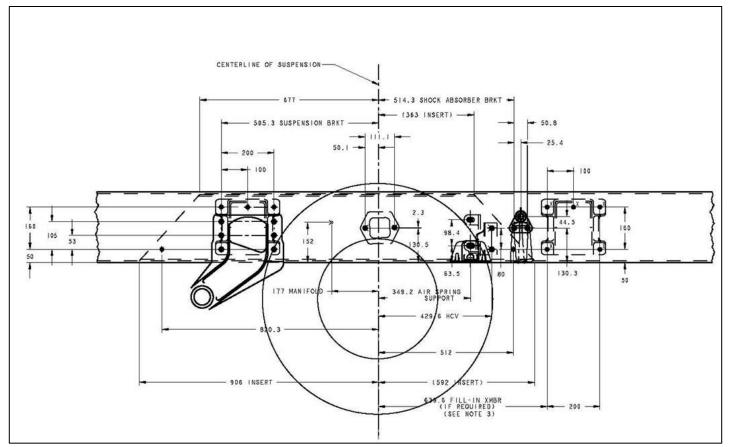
Reyco 102AR Frame Drilling (Dimensions In Millimeters)
